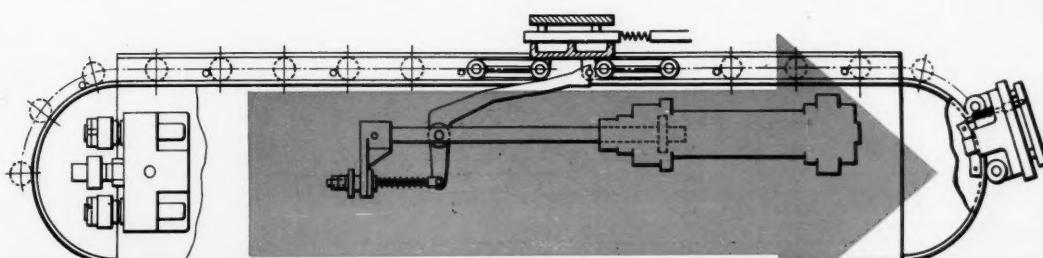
An endless chain, carrying pallets, may be used in small transfer machines for light industry.
